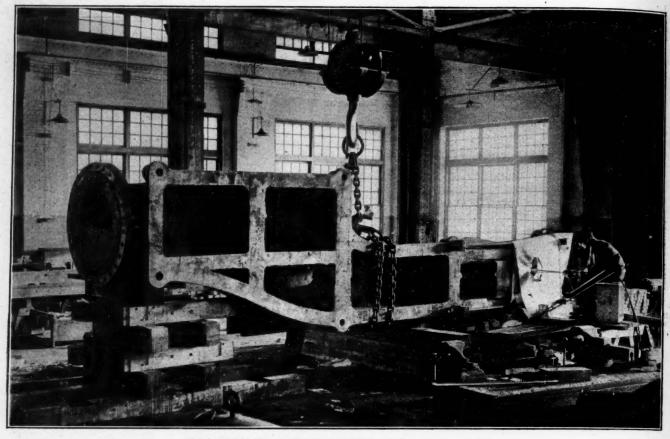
WELDING THE ENGINE FRAME IN THE SHOP
